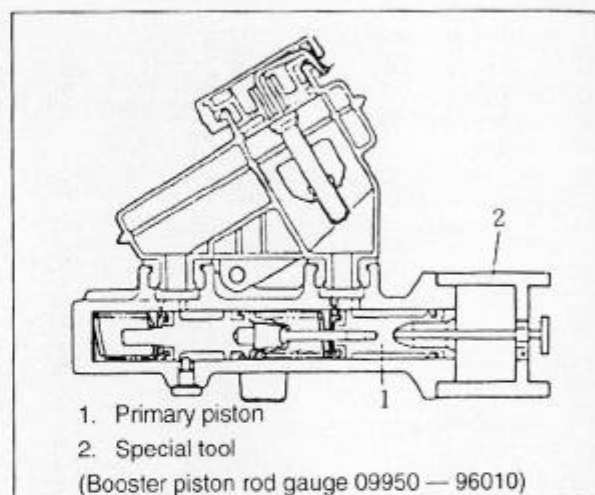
32 INSTALLATION OF SPECIAL TOOL
